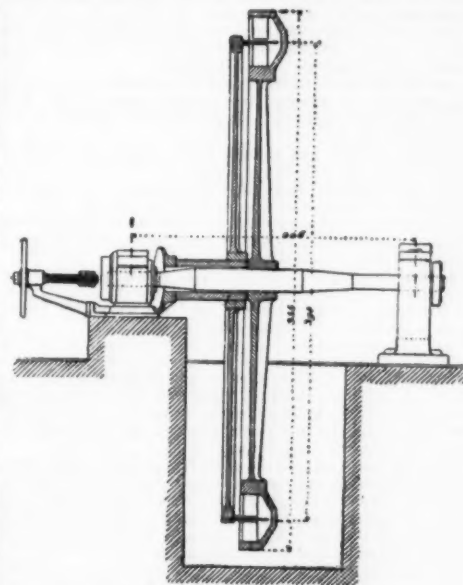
CROSS SECTION OF PATIN 40 KILOWATT ARMATURE.
